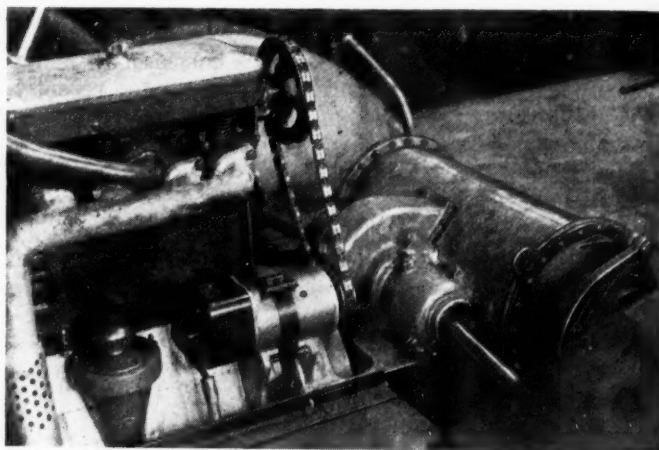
Engine and gearset showing the shafts which drive each of the front wheels
